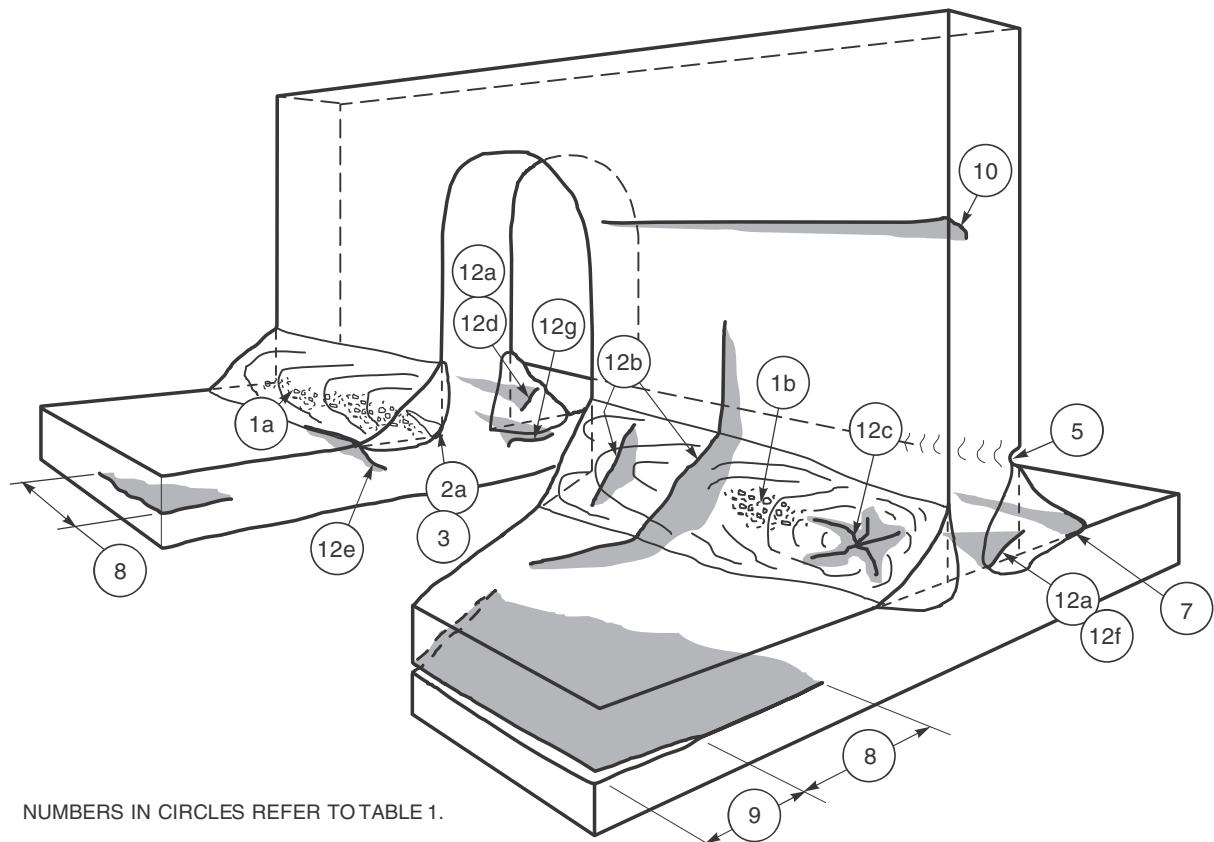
Double-Bevel-Groove Weld in T-Joint
